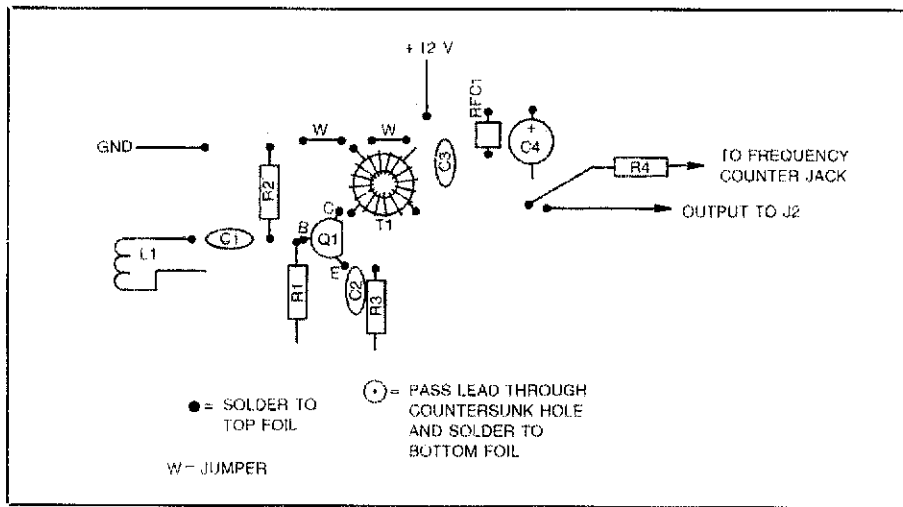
Parts-placement guide for the dipper amplifier. Parts are placed on the saw-cut side of the board.
